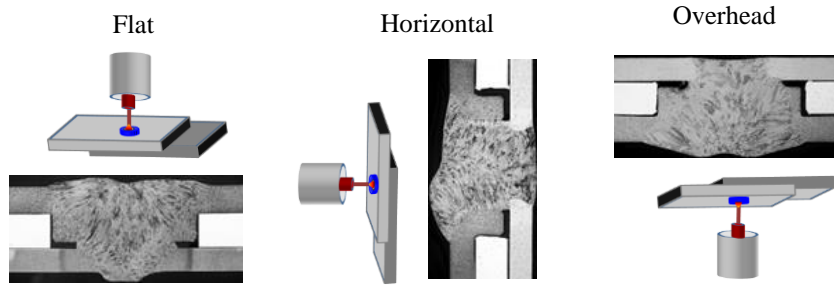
Cross-sectional macrographs of welds by EASW in flat, horizontal and overhead positions
